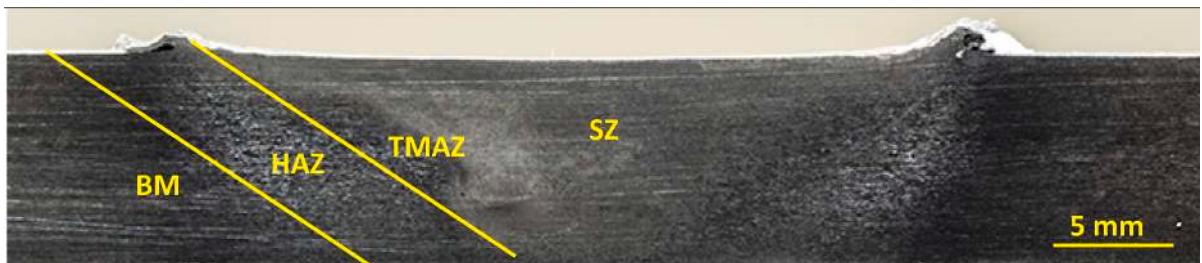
Cross-sectional macrograph of different welding zones in joints.
